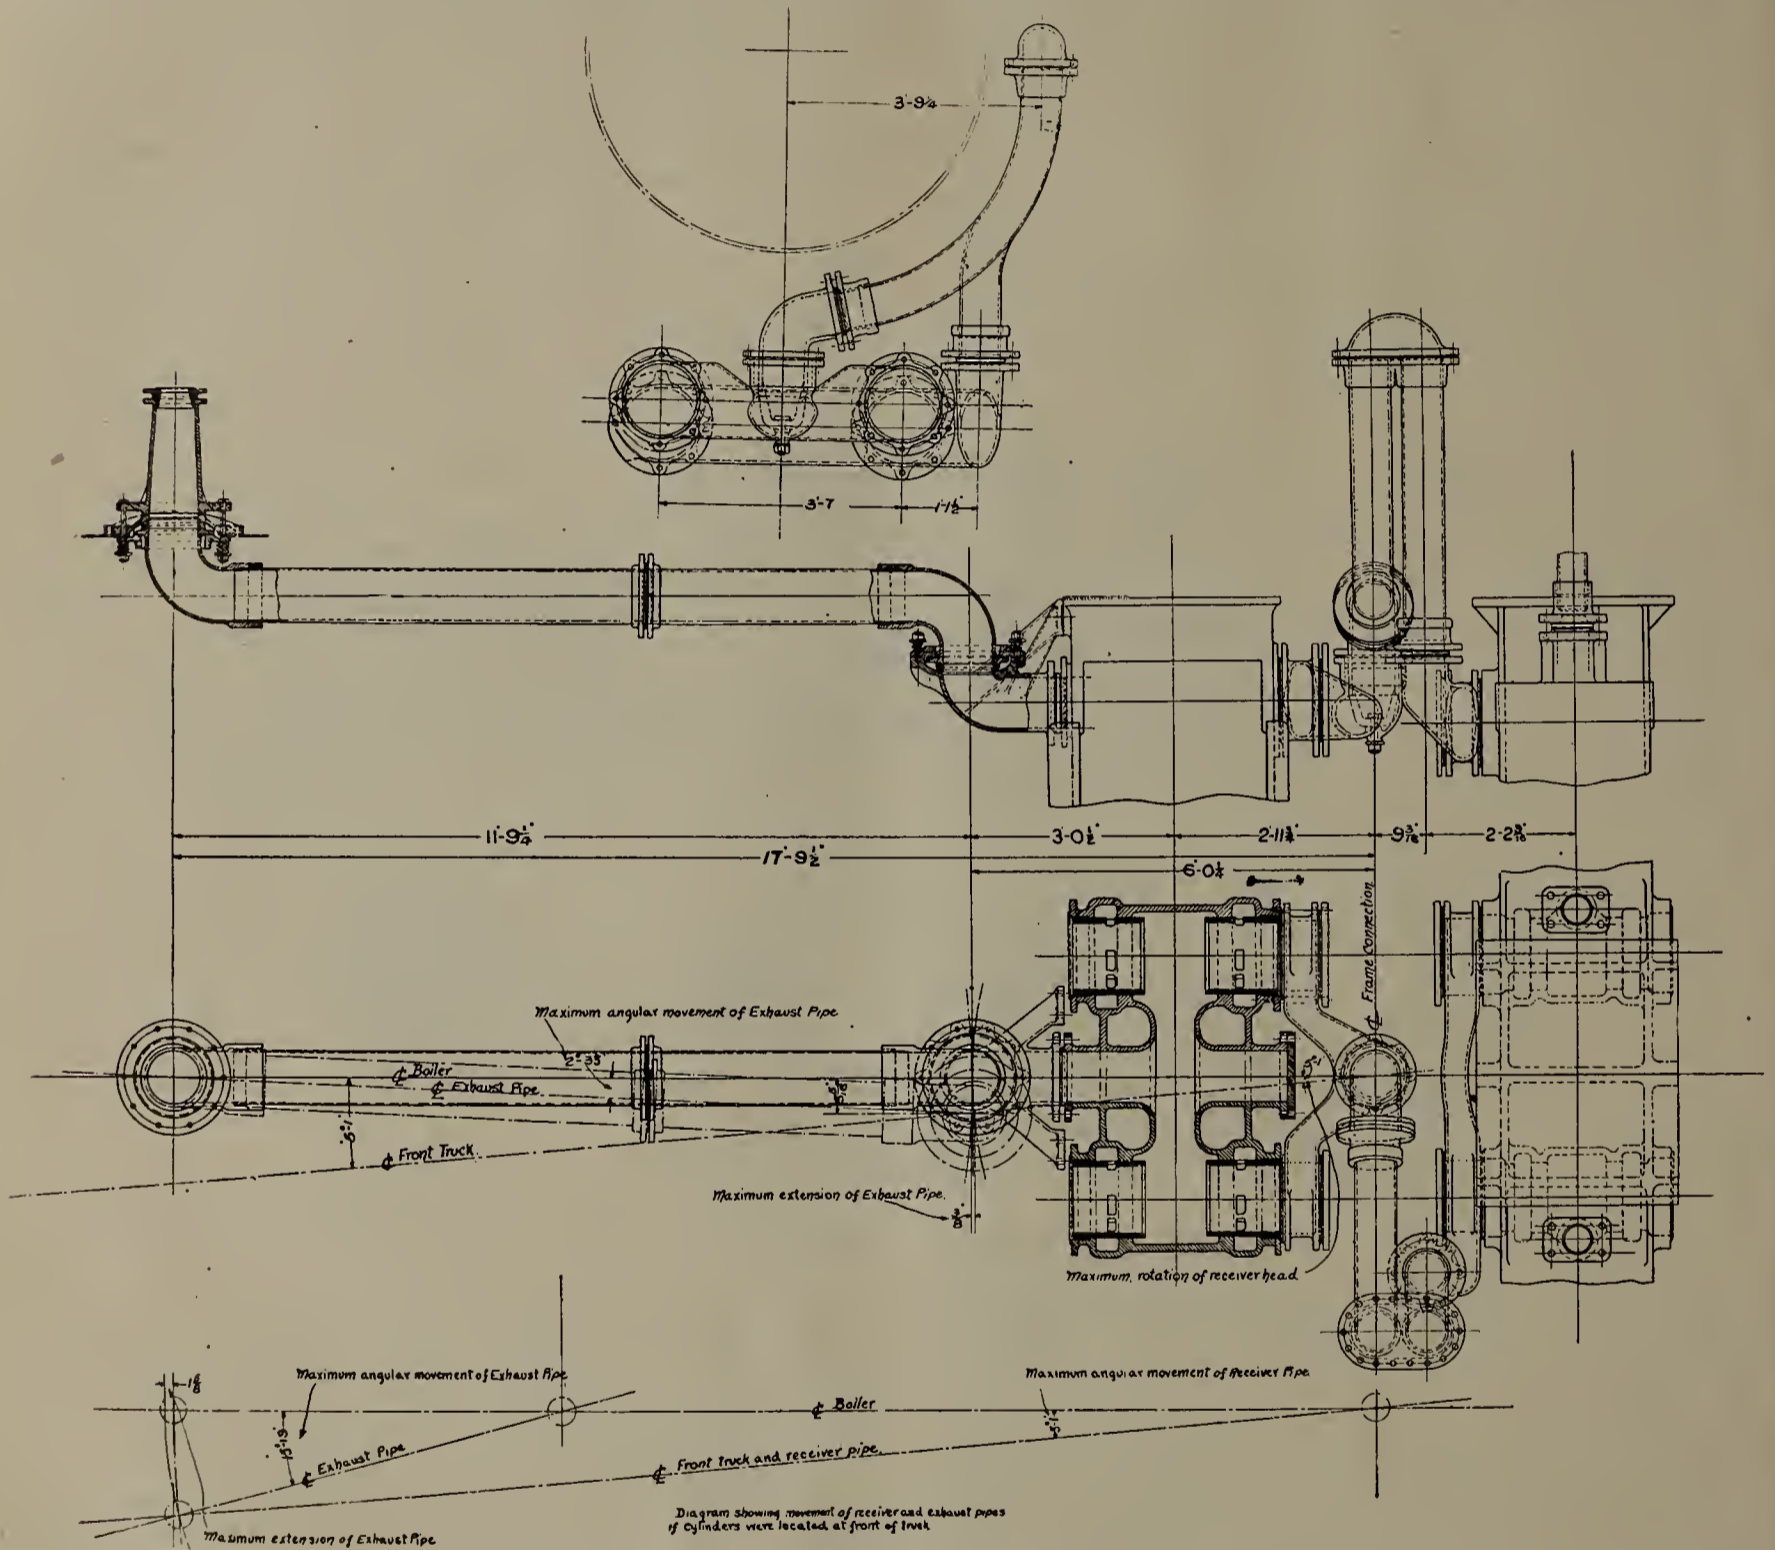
Steam, Exhaust and Receiver Pipes, Experimental Locomotive.
